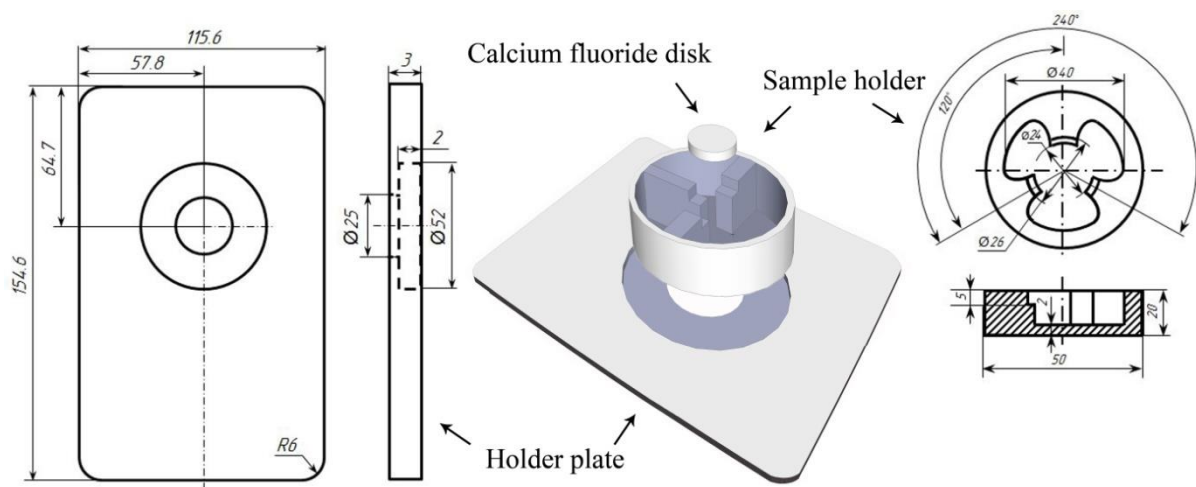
CAD drawing of sample holder and holder plate have been designed to support standard 25mm CaF₂ disk and has been manufactured in Heidelberg University workshop.
